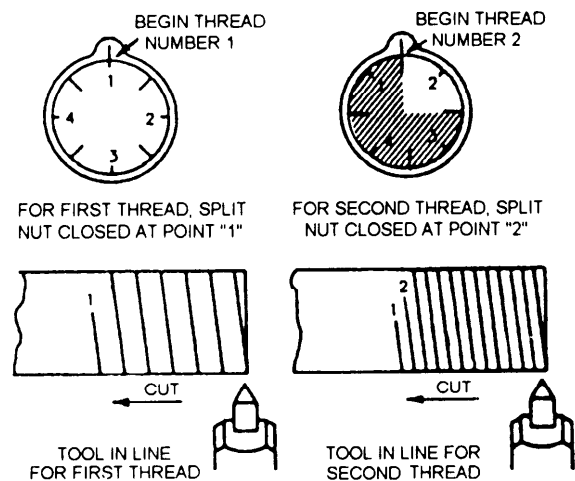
Cutting multiple threads using the thread-chasing dial.
